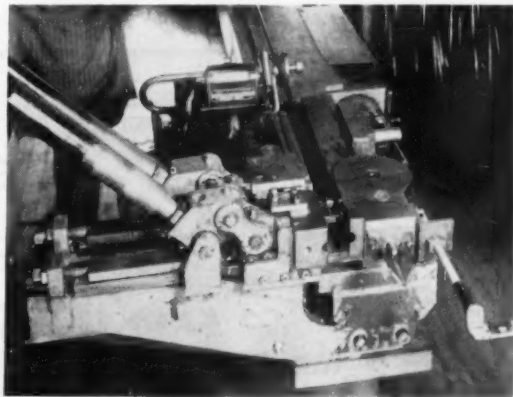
View of Pines bender, showing cycle control lever arranged on special bracket. This arrangement enables operator to load, clamp and unclamp the work from a convenient operating position.
